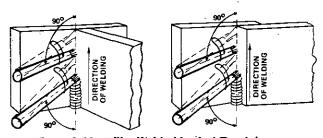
Fillet Weld - Vertical Tee Joint
